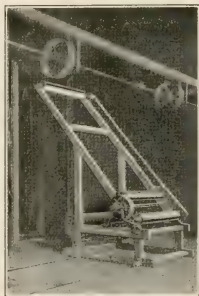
DOUBLE TEXTURE FABRIC FESTOONING MACHINE.
